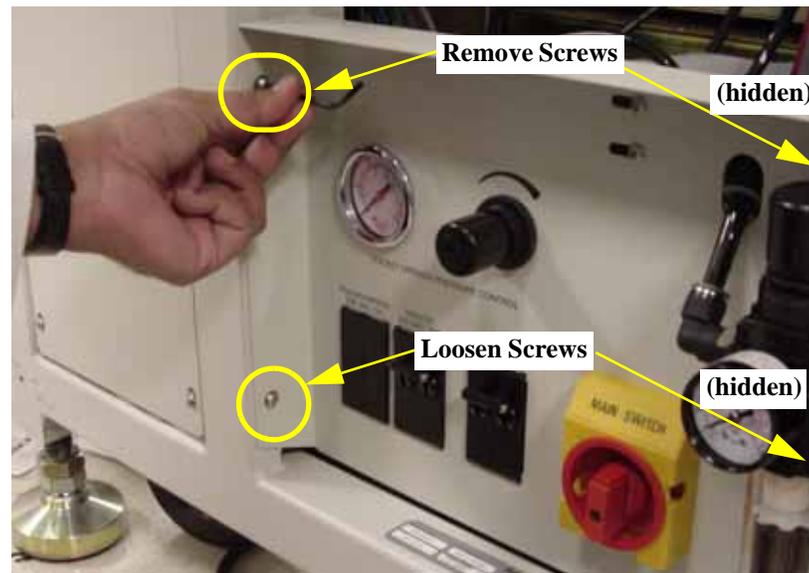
Remove top 2 screws. Loosen bottom 2 screws
